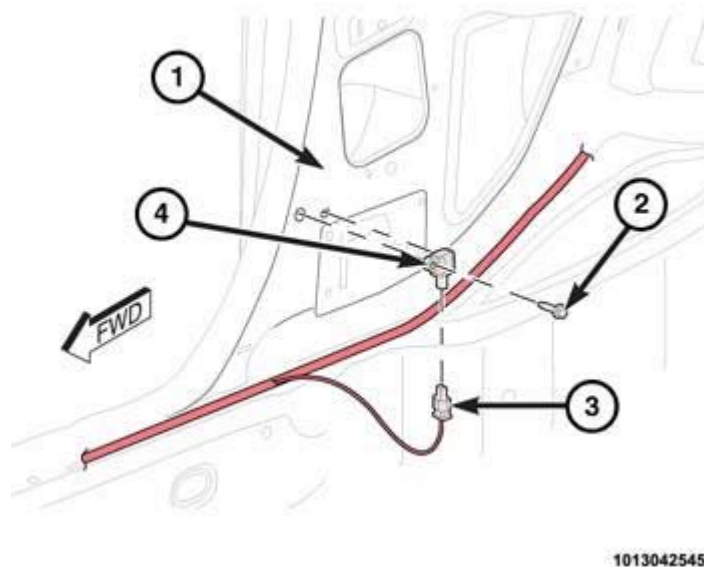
Lower B-Pillar, Side Impact Connector, Wire Harness Connector & Screw
